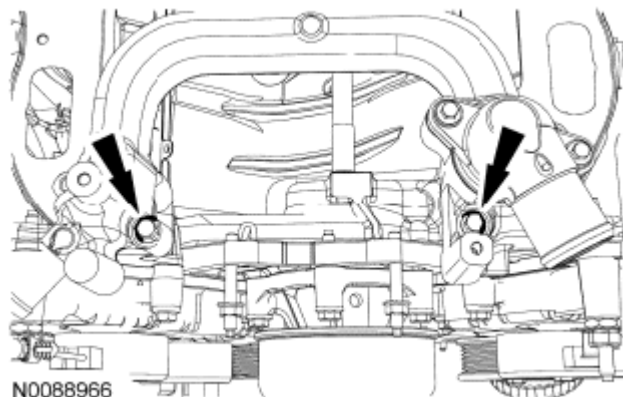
Locating Coolant Crossover Manifold And Bolts
